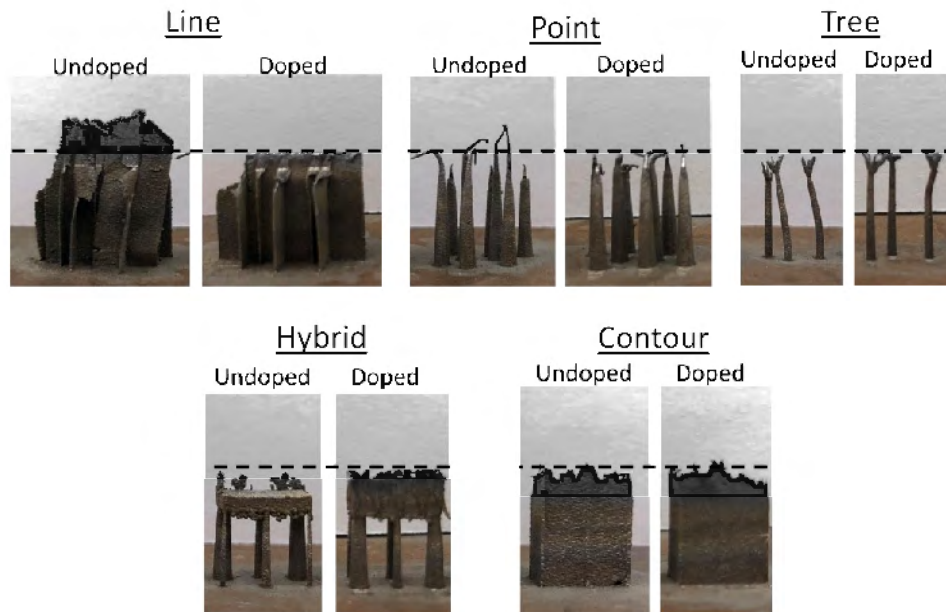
Ductile failure of supports formed by unmodified material and brittle fracture of doped supports for each support type.
